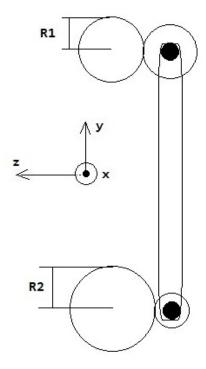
The back view of the wind turbine showing the geared connection between the main shaft at the top and the crankshaft at the bottom.
